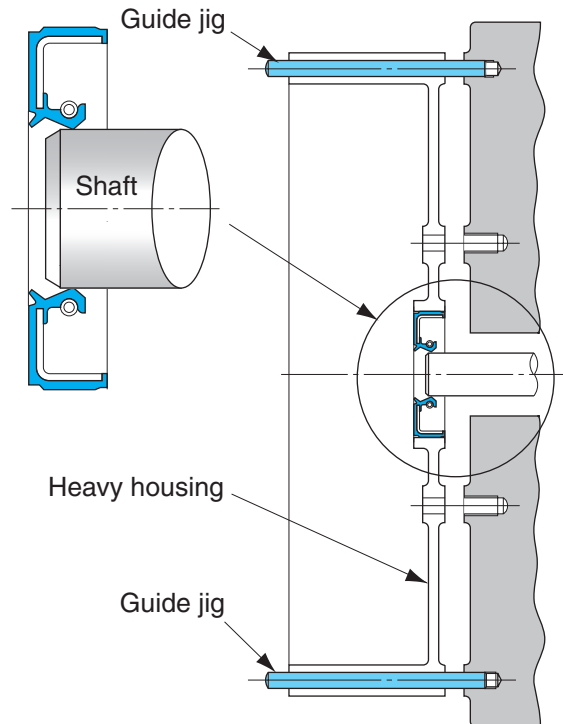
Seal protecting jig for spline, keyway, holes on shaft
